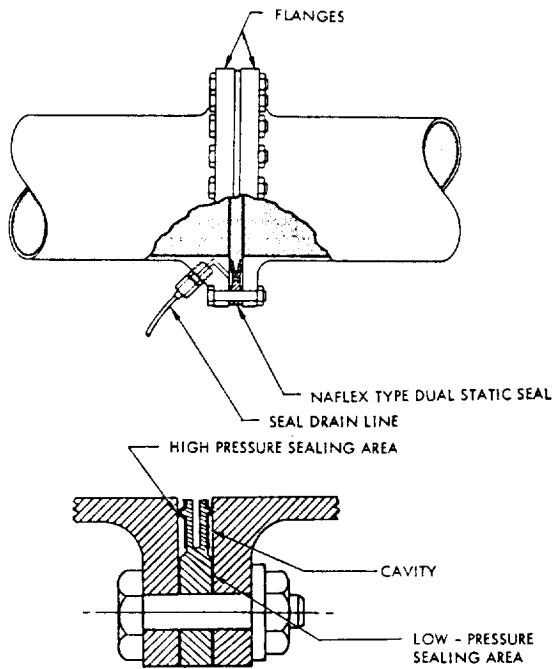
Typical design of a flange joint with Naflex-type dual static seal and seal drain line.
